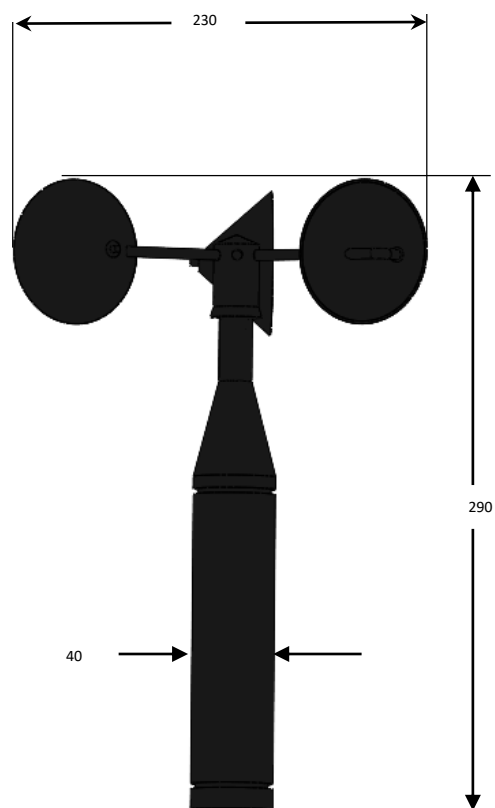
SB-SS Dimensional Drawing s- all dimensions in mm.
